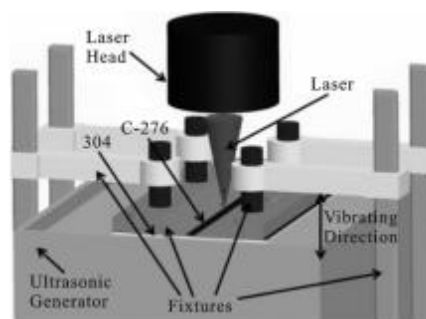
Ultrasonic vibration-assisted laser welding device
